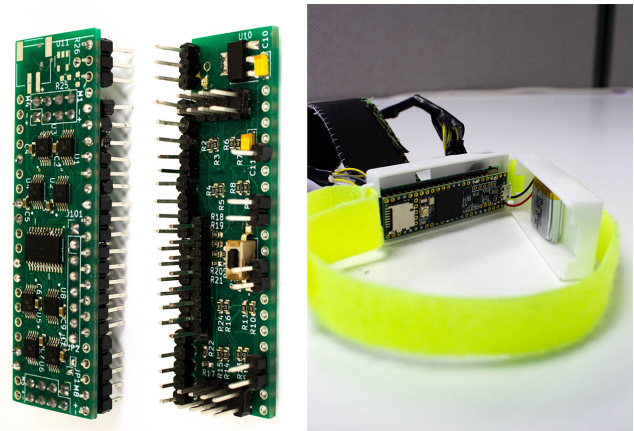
Customized PCB consisting of 8 Motor Drivers and Multiplexers. It is designed to plug a Teensy 3.6
